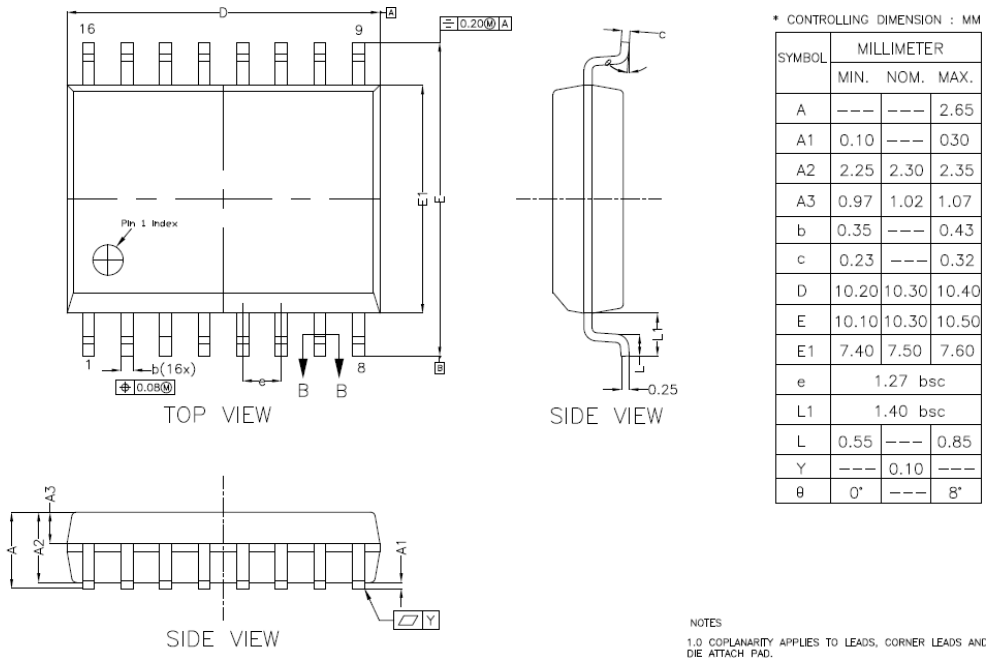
SOW16 Package Shape and Dimension in millimeters and (inches)
